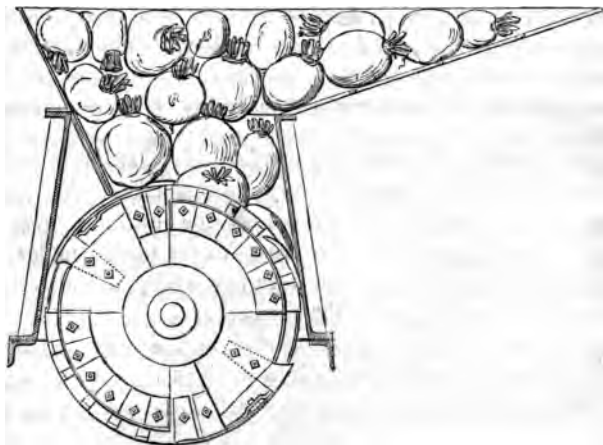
represents a general view of Gardner's machine; and fig. 40 a section through the cylinder and hopper, showing the cutting principle. Cylinder turnip-cutters
